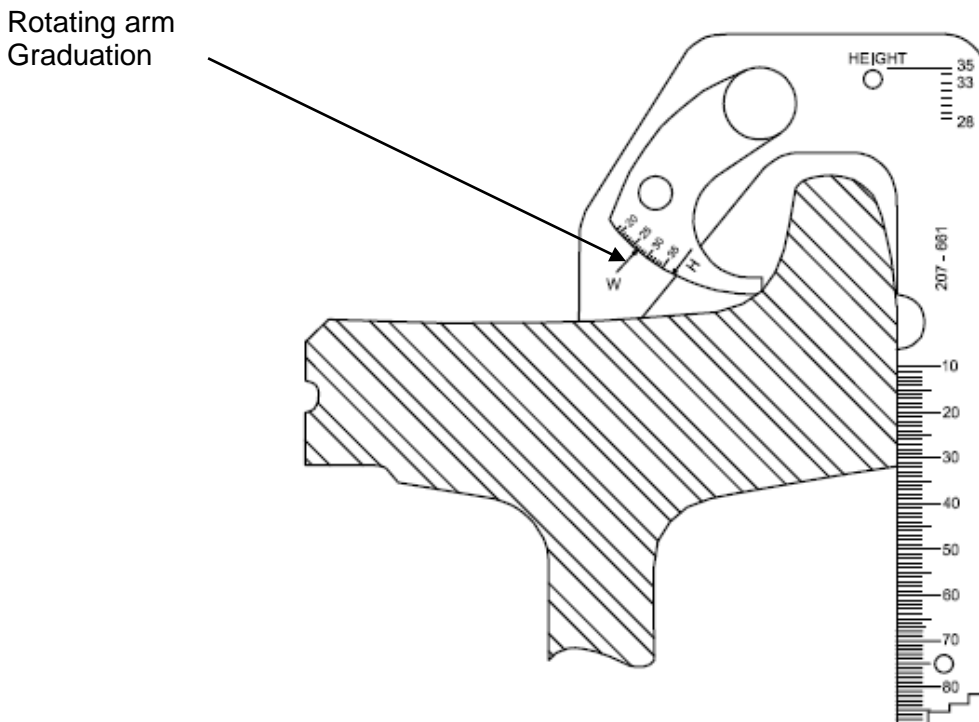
Gauge no. 207-661 flange width / thickness measurement
